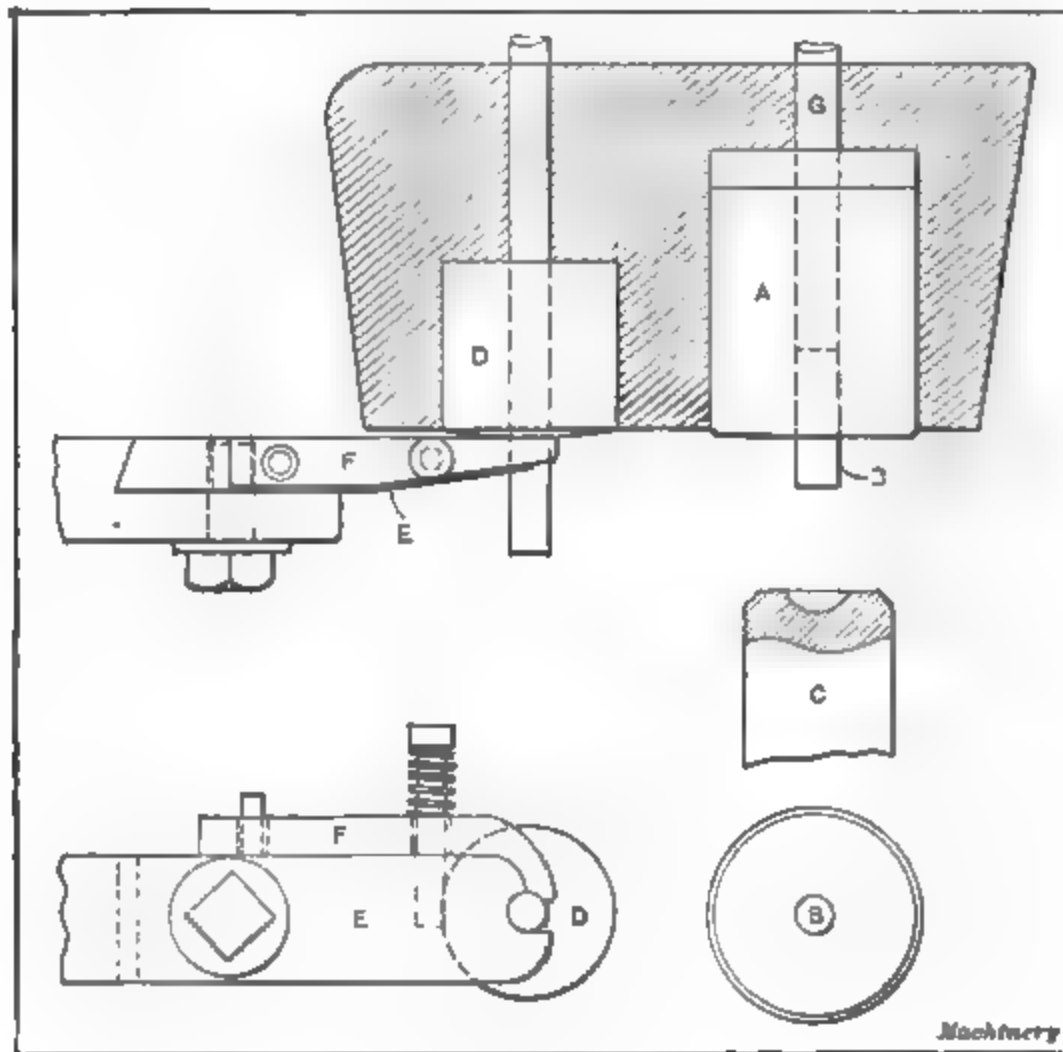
Section of Cold-header showing Locations of Principal Tools
